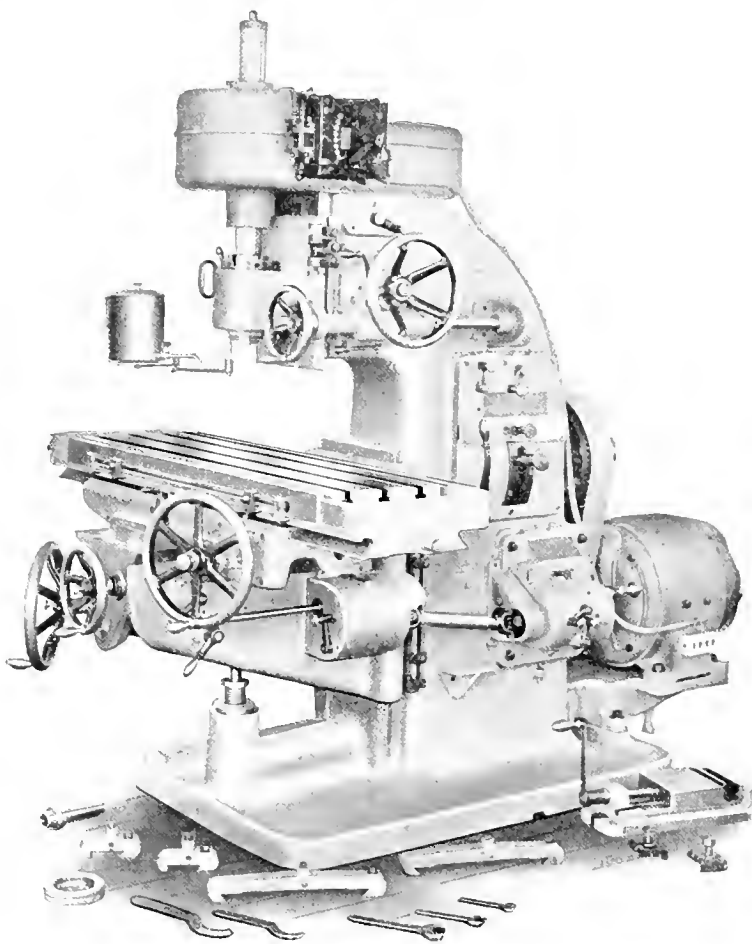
The Brown & Sharpe No. 3 Vertical Milling Machine.
